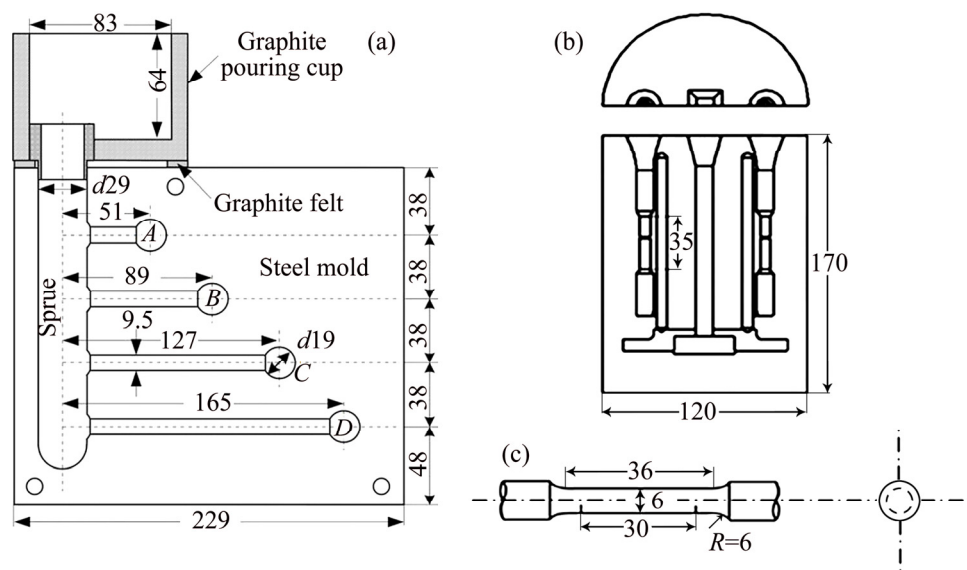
Schematic diagram of constrained-rod casting (CRC) mold (a), tensile specimens mold (b), and dimensions and geometry of tensile specimens (c) (unit: mm)
